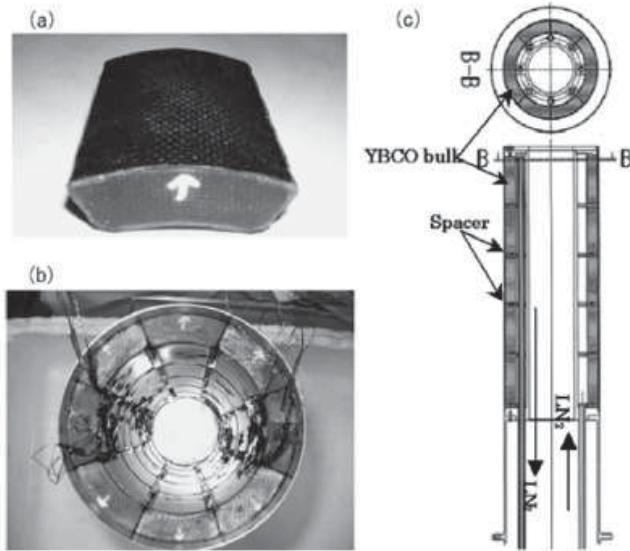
a) A YBCO bulk superconductor tile used in the NEDO flywheel project. b) A fully constructed SMB stator with YBCO tiles. c) Section view of the SMB stator, with liquid nitrogen running in the center of the stator housing. [62].
